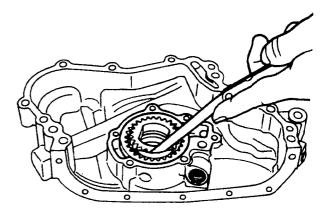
CHECKING CLEARANCE BETWEEN OUTER GEAR TOOTH END AND CRESCENT
